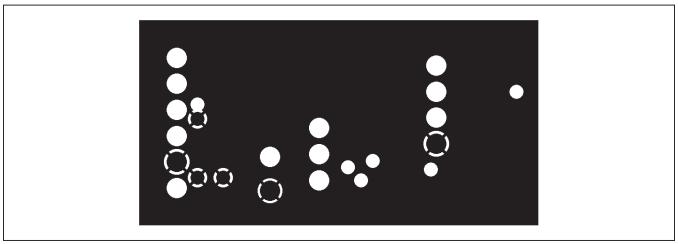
MAX5216PMB1 Peripheral Module PCB Layout—Inner Layer 1 (Ground)
